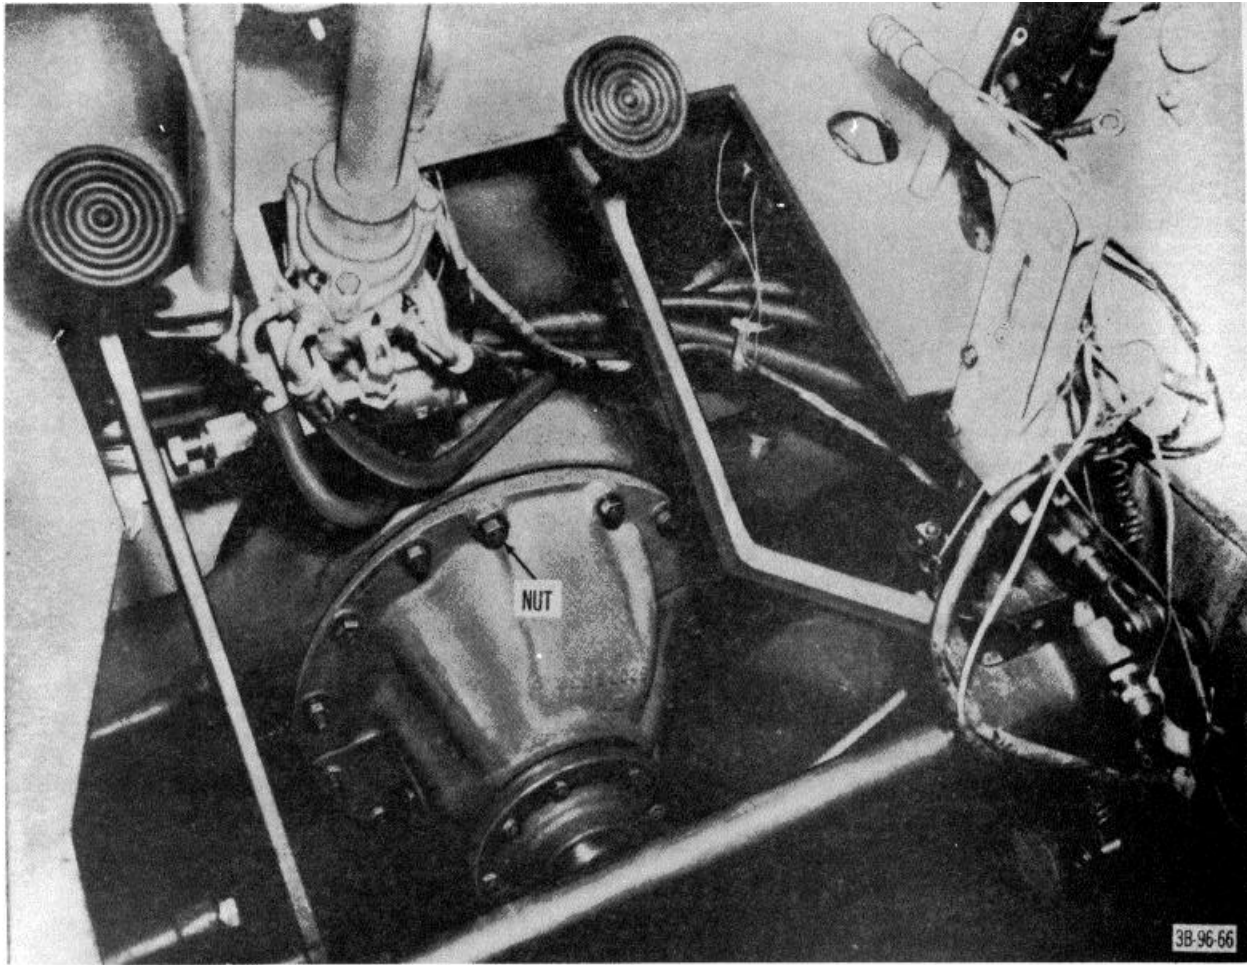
Drive axle and differential and carrier assembly, installed on truck.
